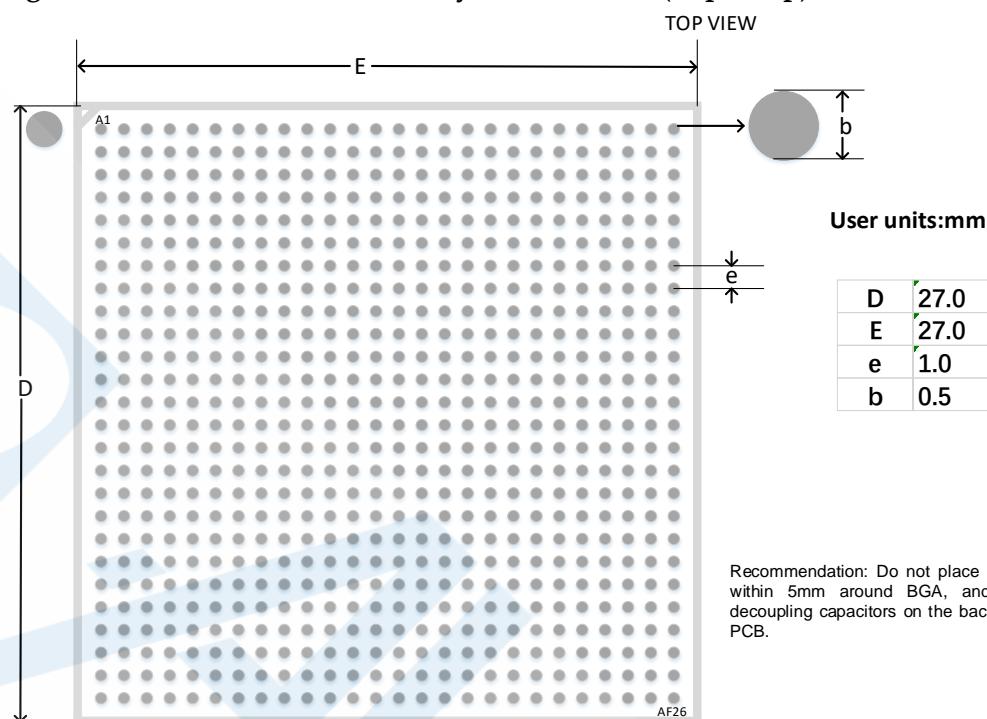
Recommended PCB Layout FPG676A (Flip Chip)
